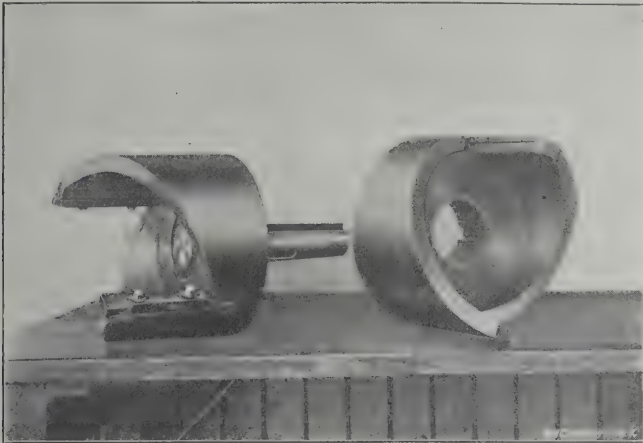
Type of Tools used in the Operation shown in Fig. 26; These Tools remove a Solid Core from the Hole
